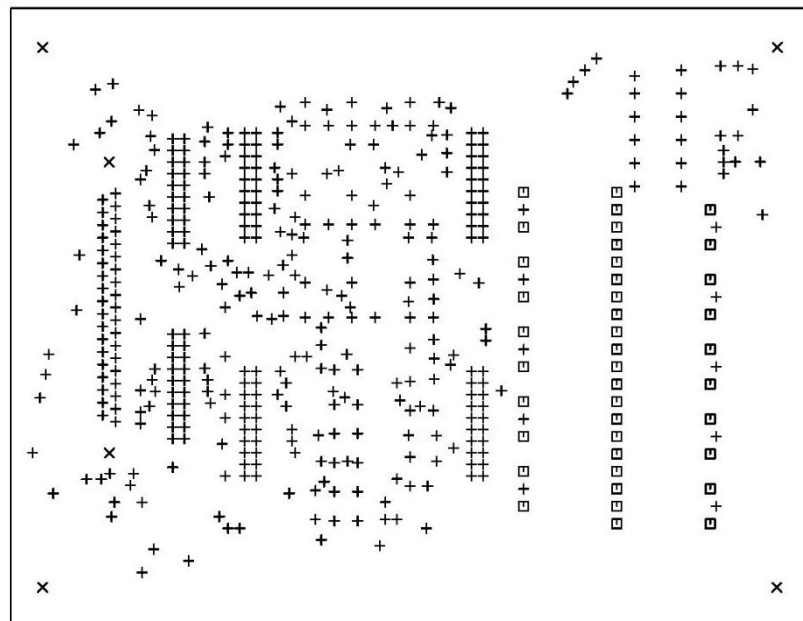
Miniature Semiconductor Breakout Box Assembly diagram. PCB size 175 mm x 145 mm
